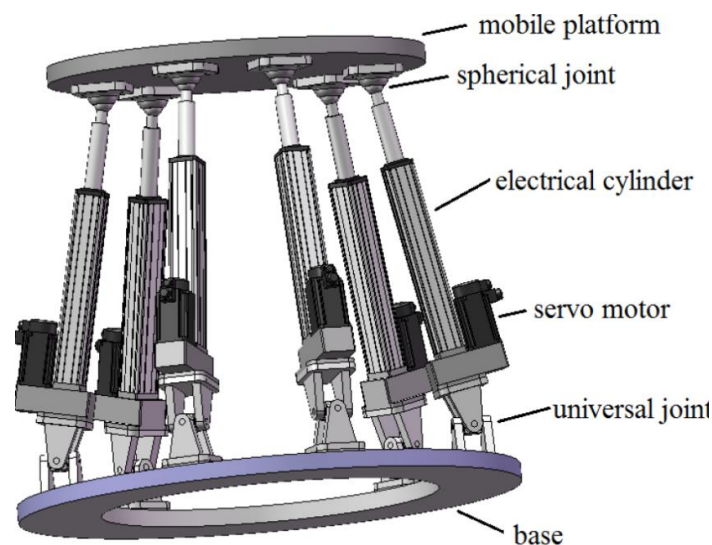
A basic Stewart Platform. This shows fundamental parts of a Stewart platform design. It includes a base with six servo motors and encoders attached via a universal joint. These extend and retract to allow the top mobile platform to move (Duan, Mi, and Zhao 2016).
